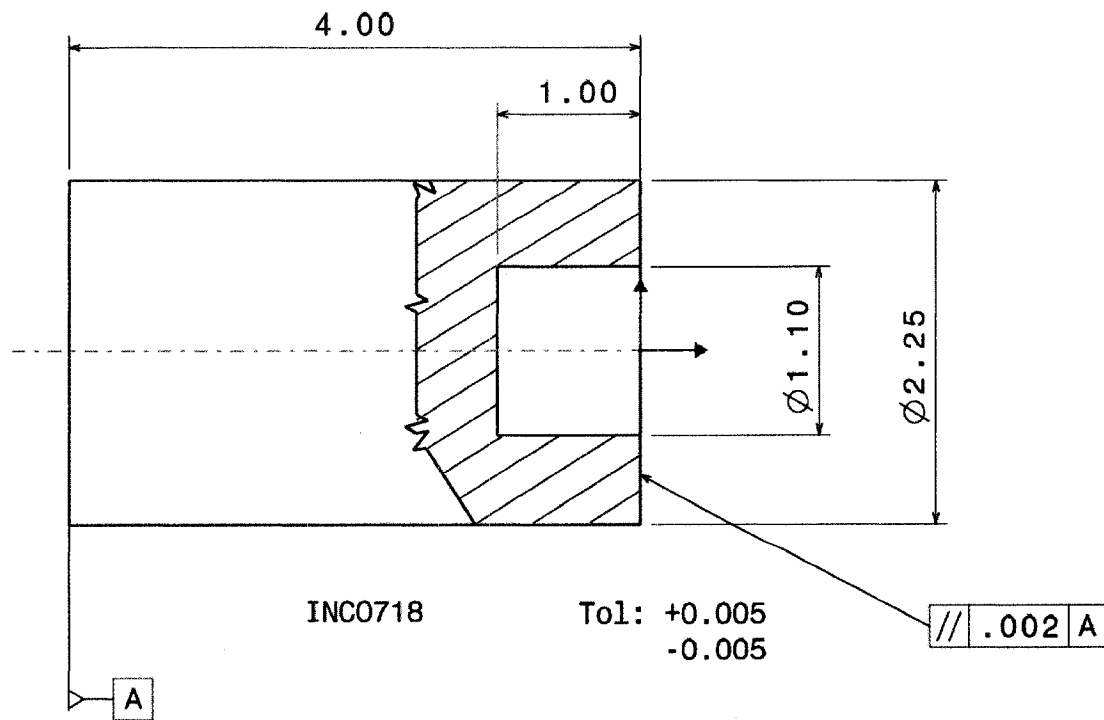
Inconel 718 test piece configuration for friction welding
